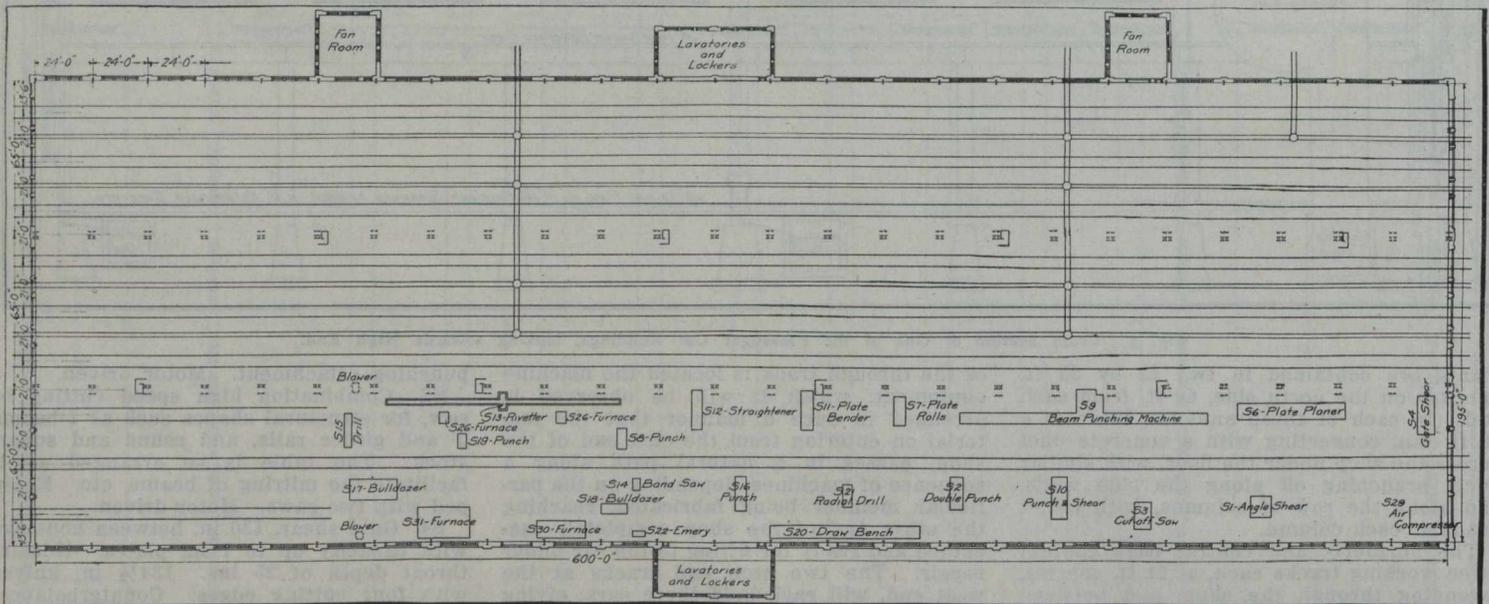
Plan of Freight Car Shop, showing Machine Tool Layout in the Steel Car Shop Section.
